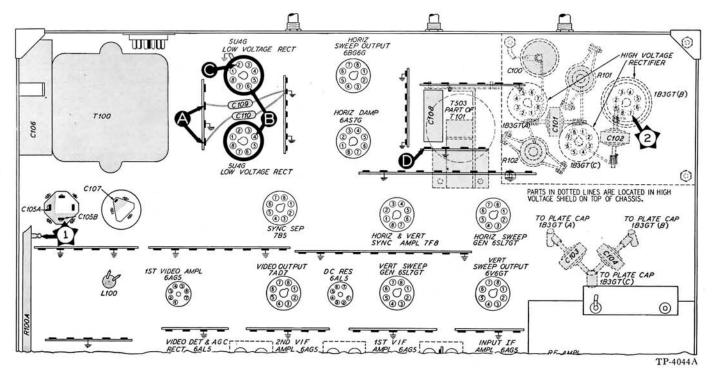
Bottom View of Chassis, Showing Section 1 Test Points
